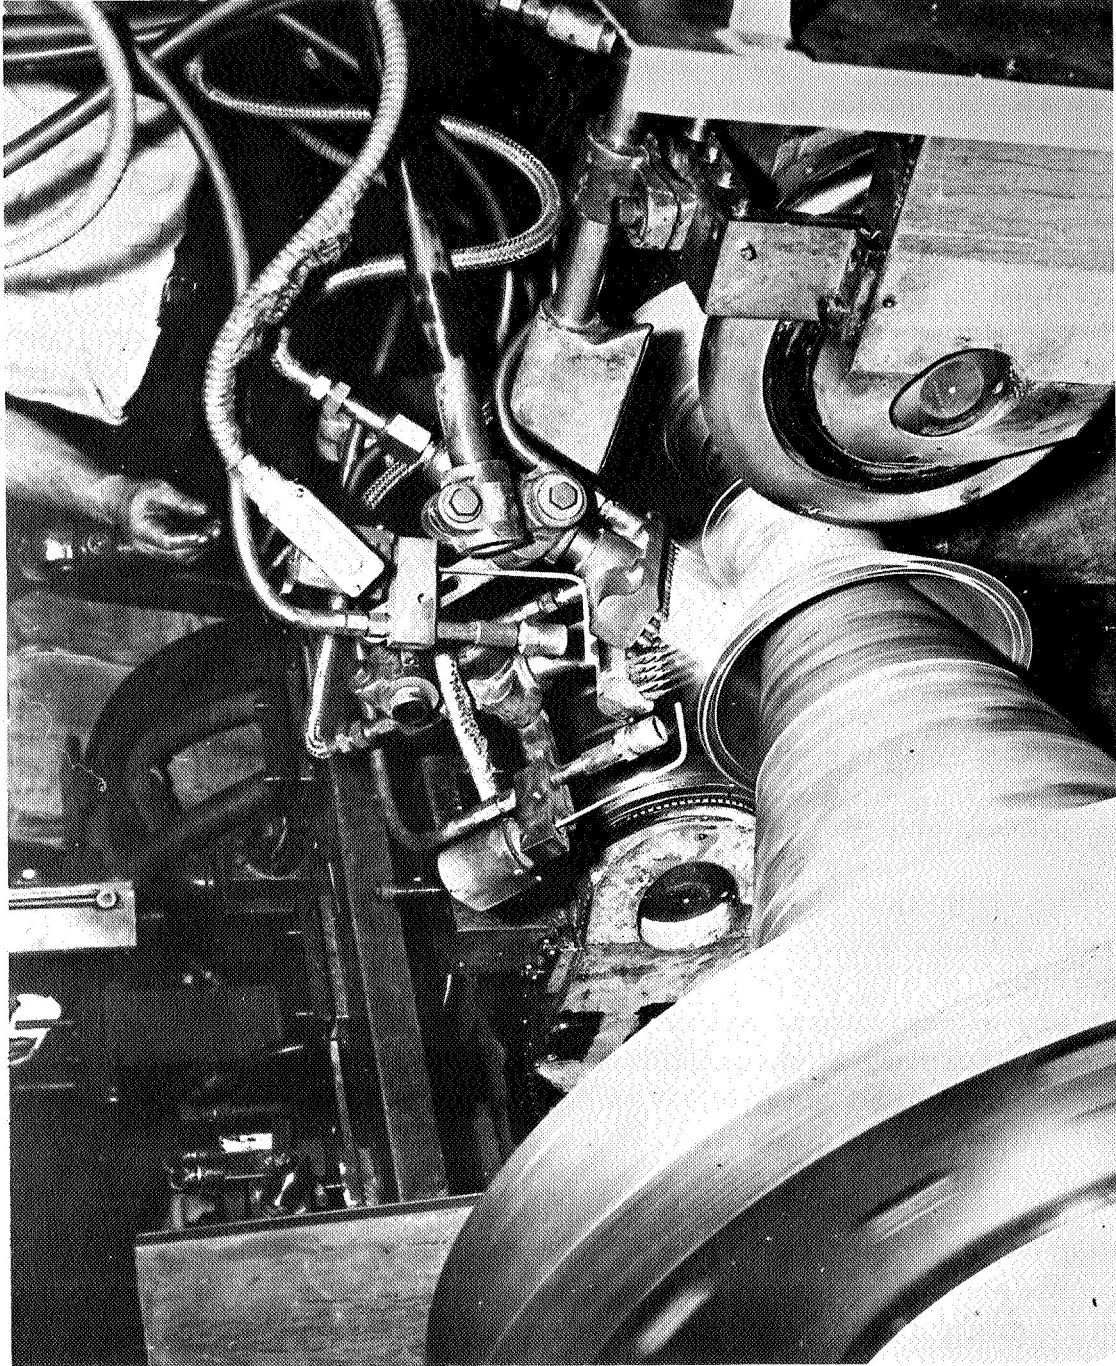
TORCH HEATING OF A BLANK DURING CONE SHEAR FORMING (REF. 69)
